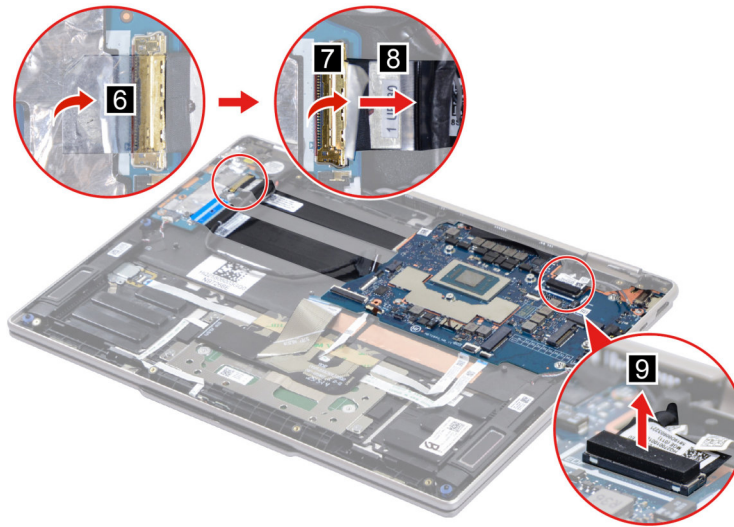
Disconnect the LVDS cable connected to the I/O board and disconnect the EDP cable from system board (AMD models)
